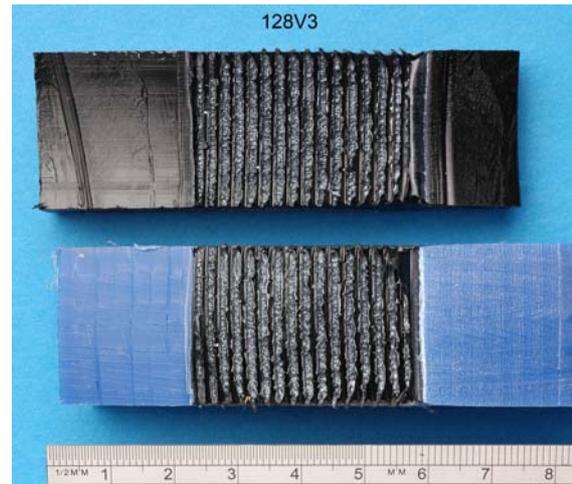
Fig.V Fracture surface of ISO peel decohesion test specimen showing fully ductile failure through the plane of the heating wires.
